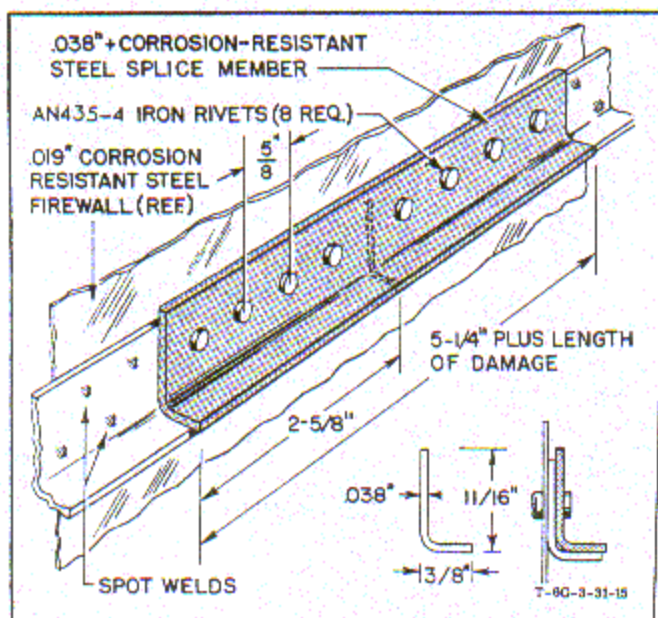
Fire Wall Narrow-Flanged Stiffener Splice
